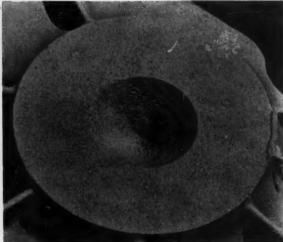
Cast surface, 2.0 per cent resin-zircon sand shell mold.
